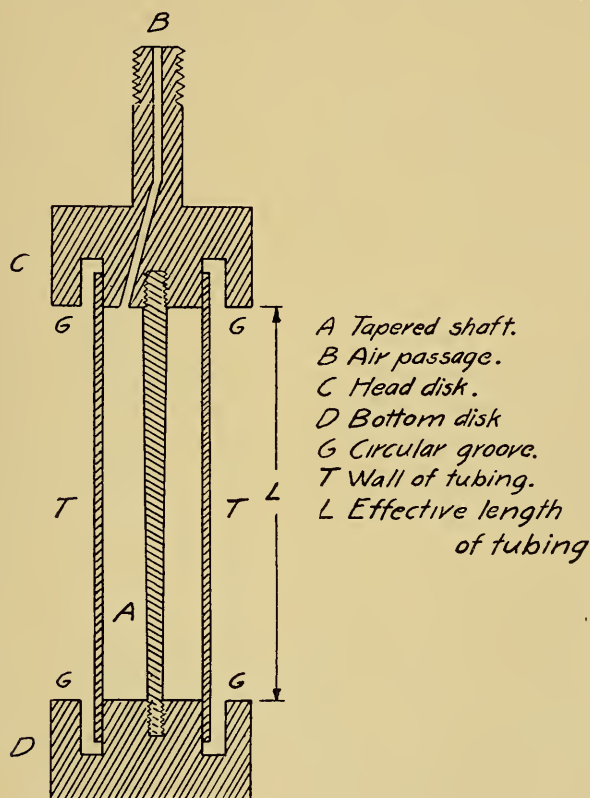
CROSS-SECTION OF SPINDLE FOR MOUNTING A TUBE FOR COLLAPSE
